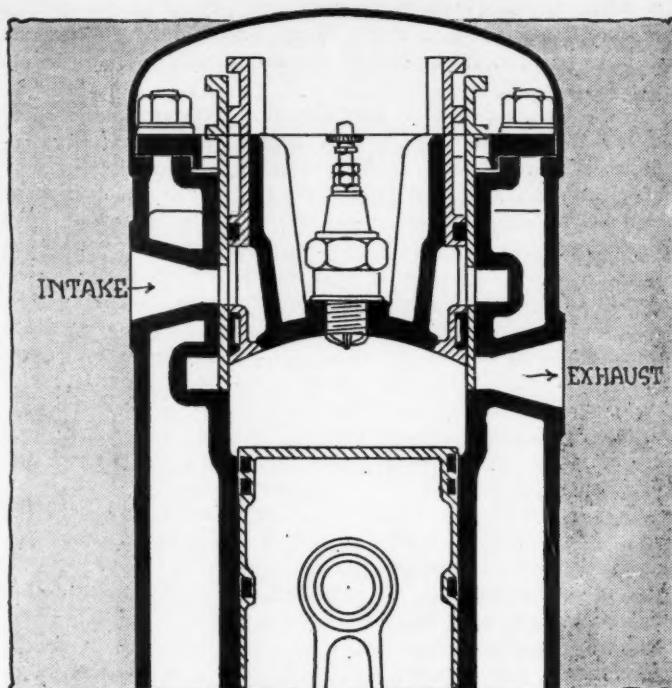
Overhead sleeve-valve design by Crossley Motors
